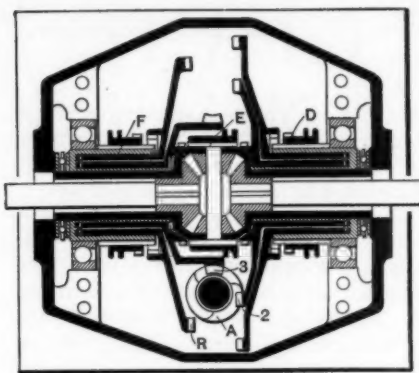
Cross sectional view of a worm change speed gear mounted on the rear axle.
